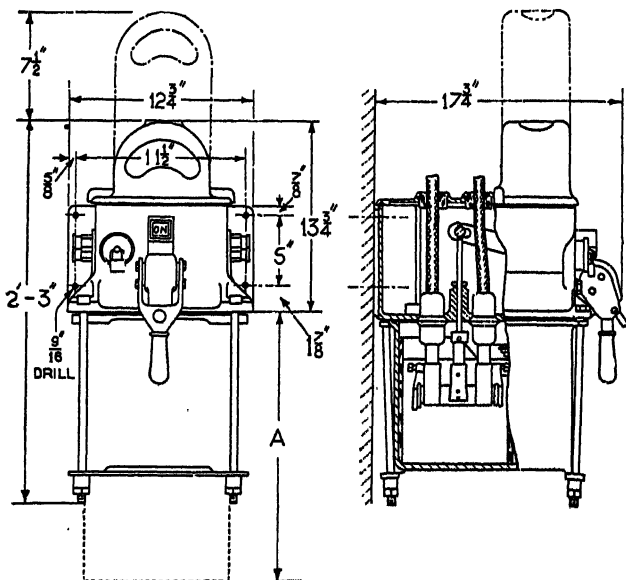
A. SECTIONAL VIEWS OF WALL-MOUNTED OIL CIRCUIT BREAKER
